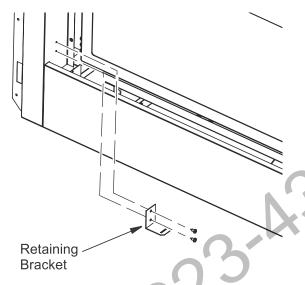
Installing Access Door Retaining Brackets for See-Thru Applications
